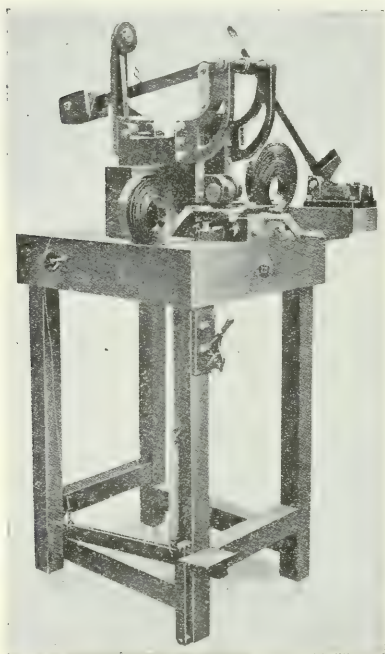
ELECTRIC WELDER FOR STEEL TAPE
